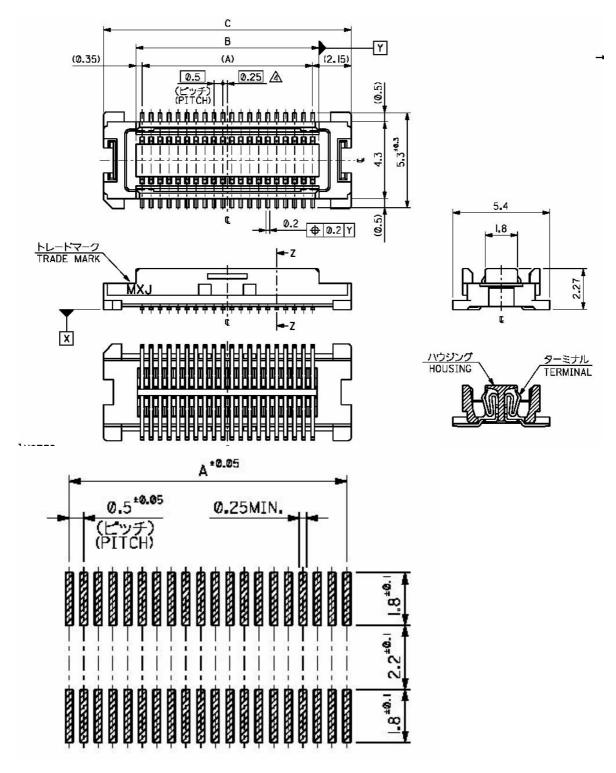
Molex board-to-board connector 52991-0808 on TC65i
